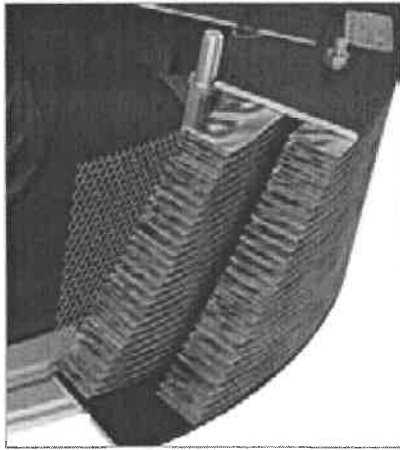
New type of crankcase explosion relief valves with two flame arresters - type approved in 2007.
